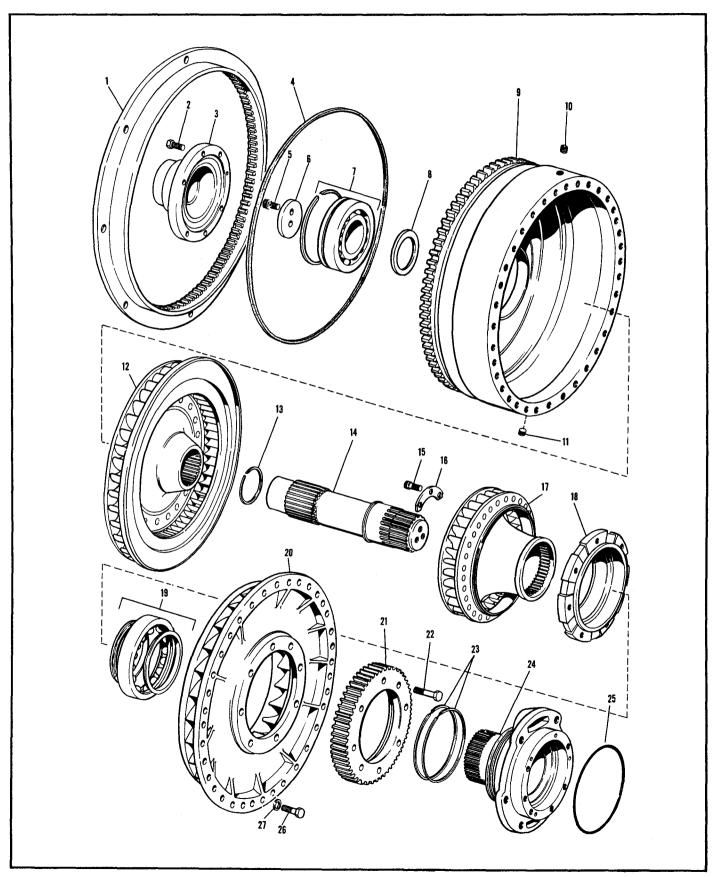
Model 6-F-1514 Series Single-Stage Torque Converter - Exploded View.
